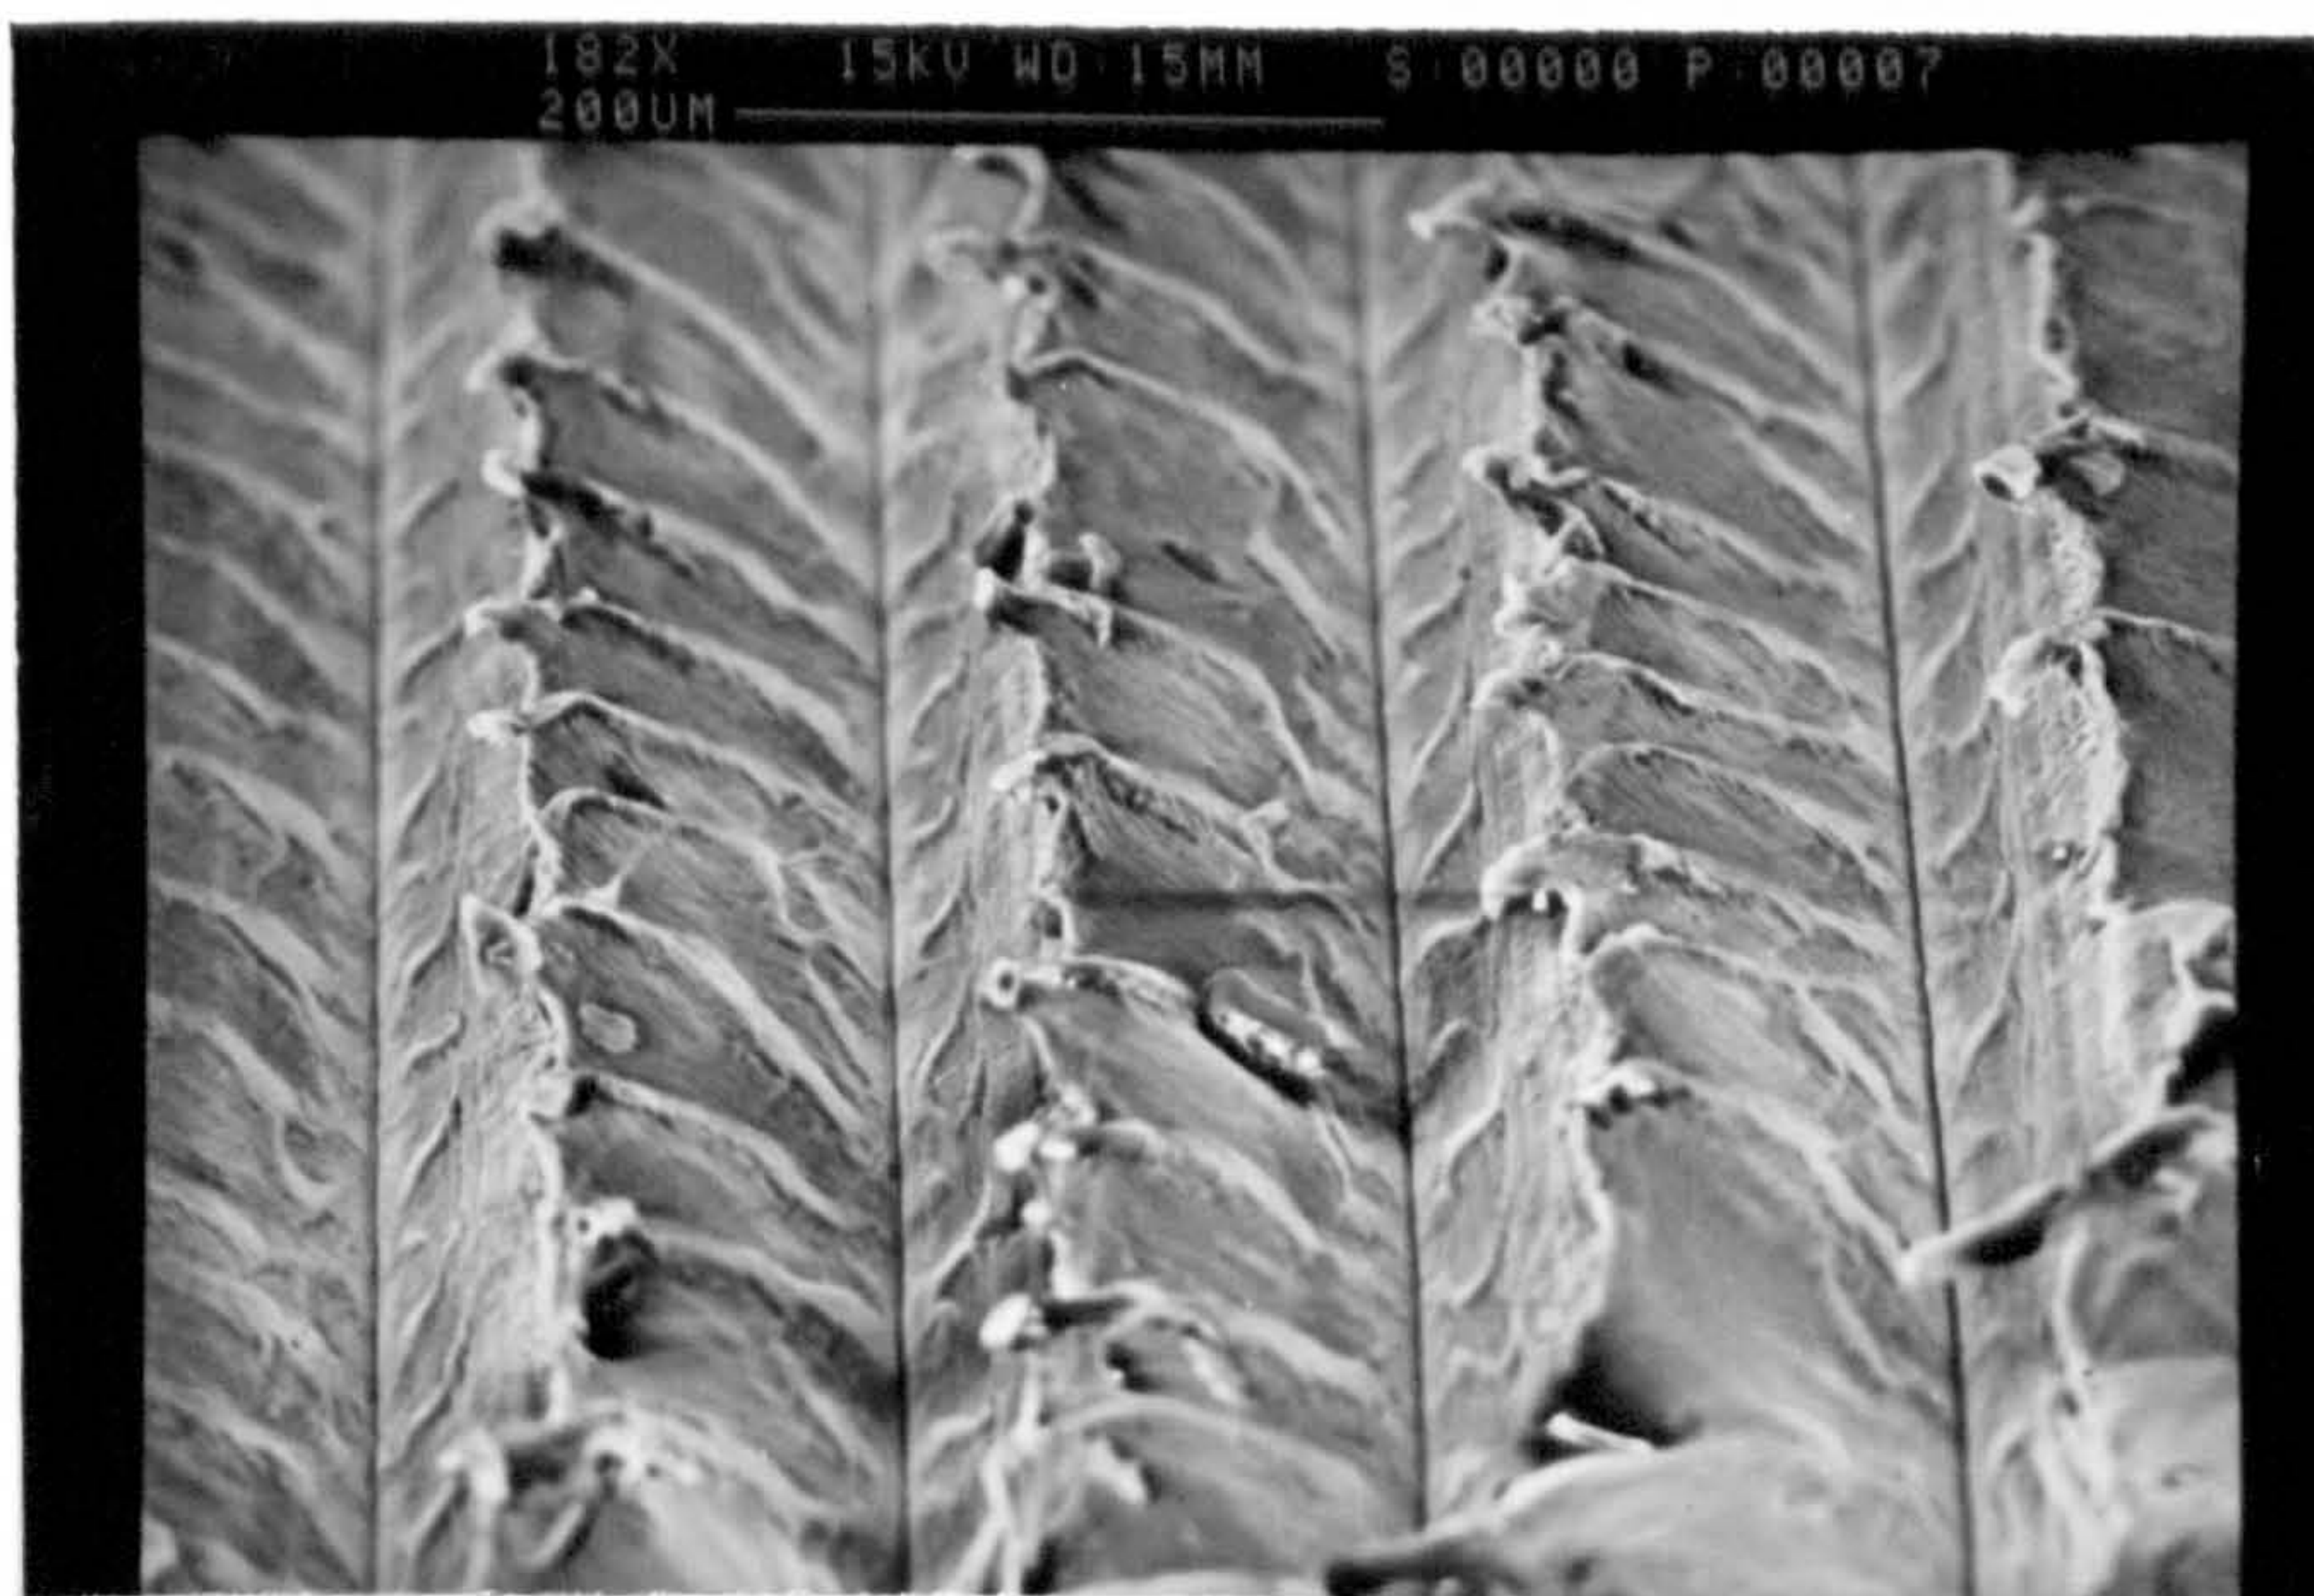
HDPE surface machined at  $-20^\circ$  rake angle, showing intermittent ridges. (Speed = 25m/min, feed = 0.16 mm/rev)
